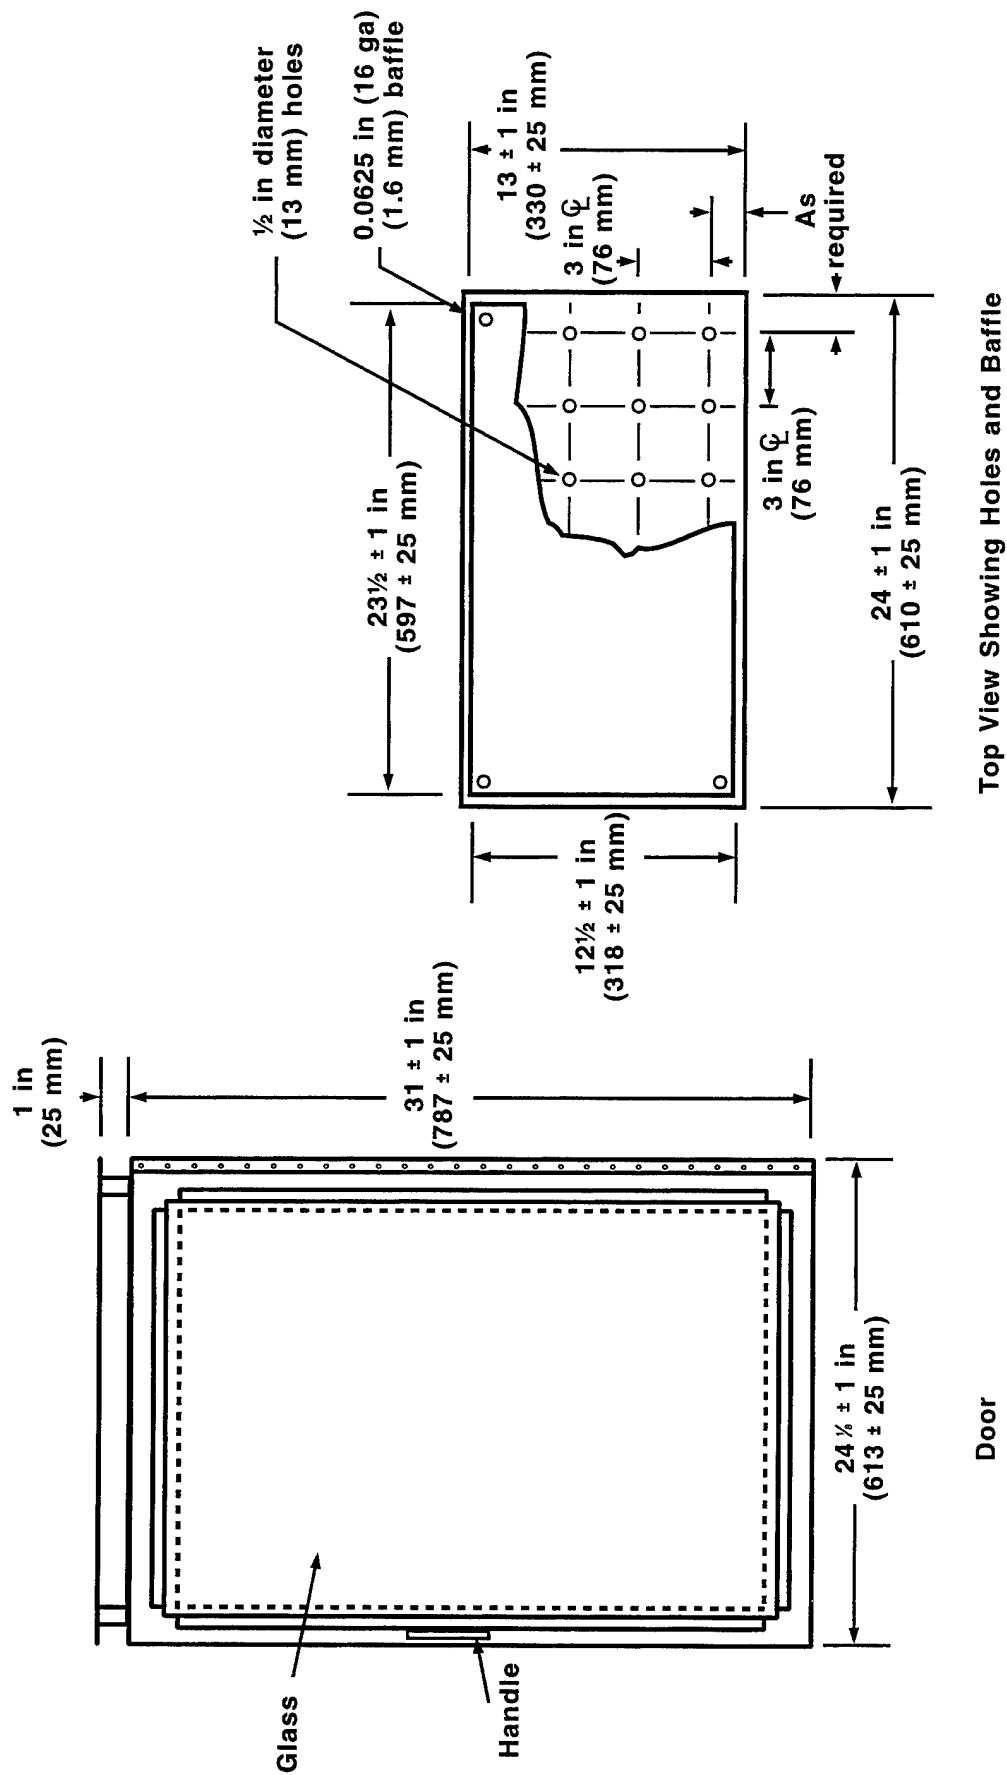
FRONT AND TOP VIEW OF BUNSEN BURNER TEST CABINET
